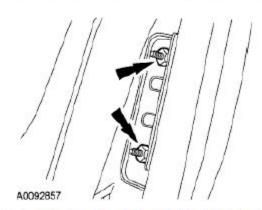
Locating Side Air Bag Module Nuts Courtesy of MAZDA MOTORS CORP.
